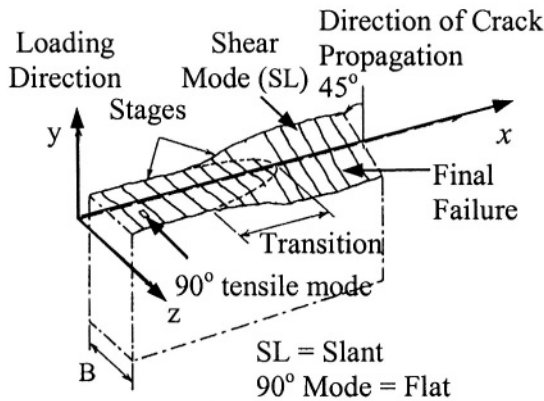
Schematic fracture surface transition from flat to slant appearance [15].
